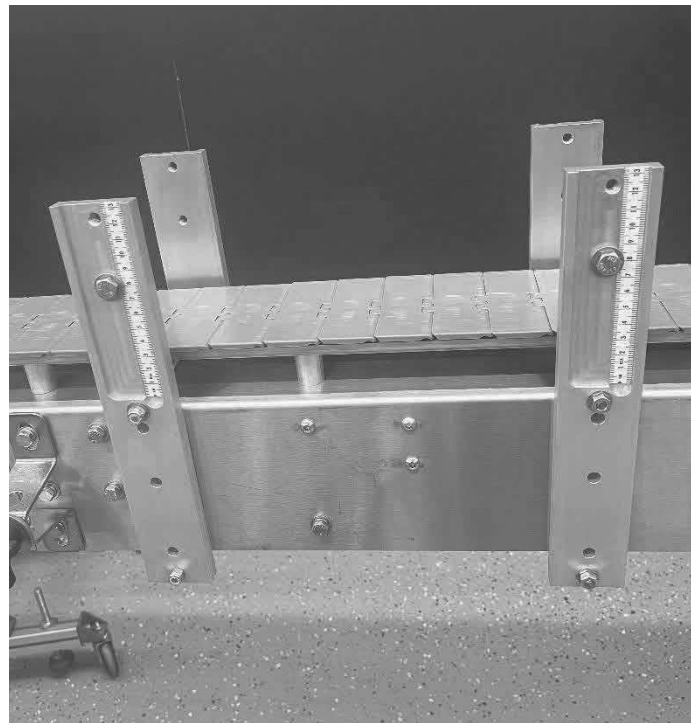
BCV2 Mounting Assembly with Tall Vertical Adjustment Bars
